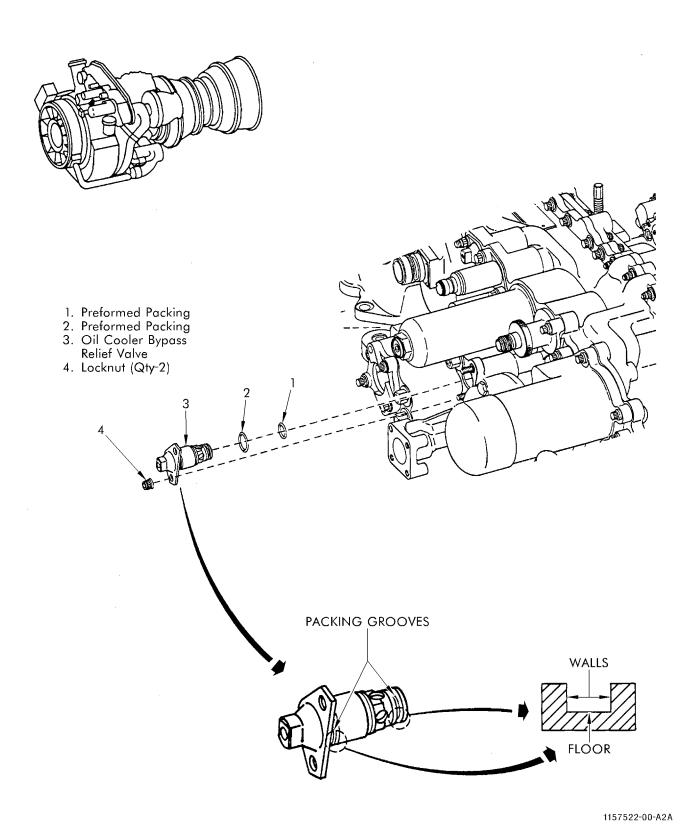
Oil Cooler Bypass Relief Valve; Removal, Inspection, and Installation
